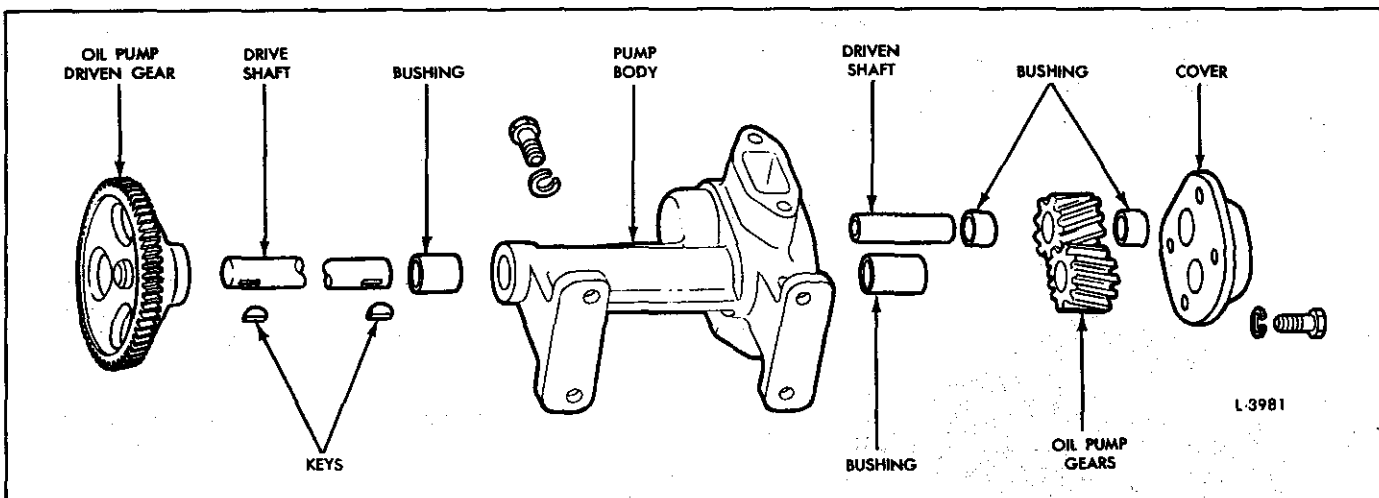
Lubricating Oil Pump Details and Relative Location of Parts (8V Engine)
